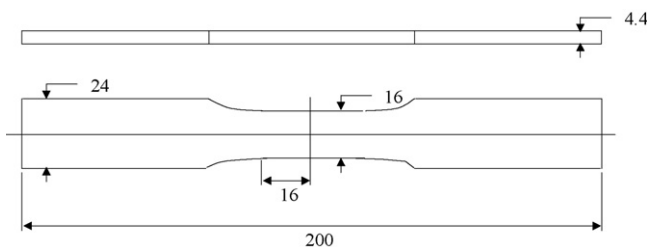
C410 specimen geometry used in this study. Dimensions are in millimeters.
